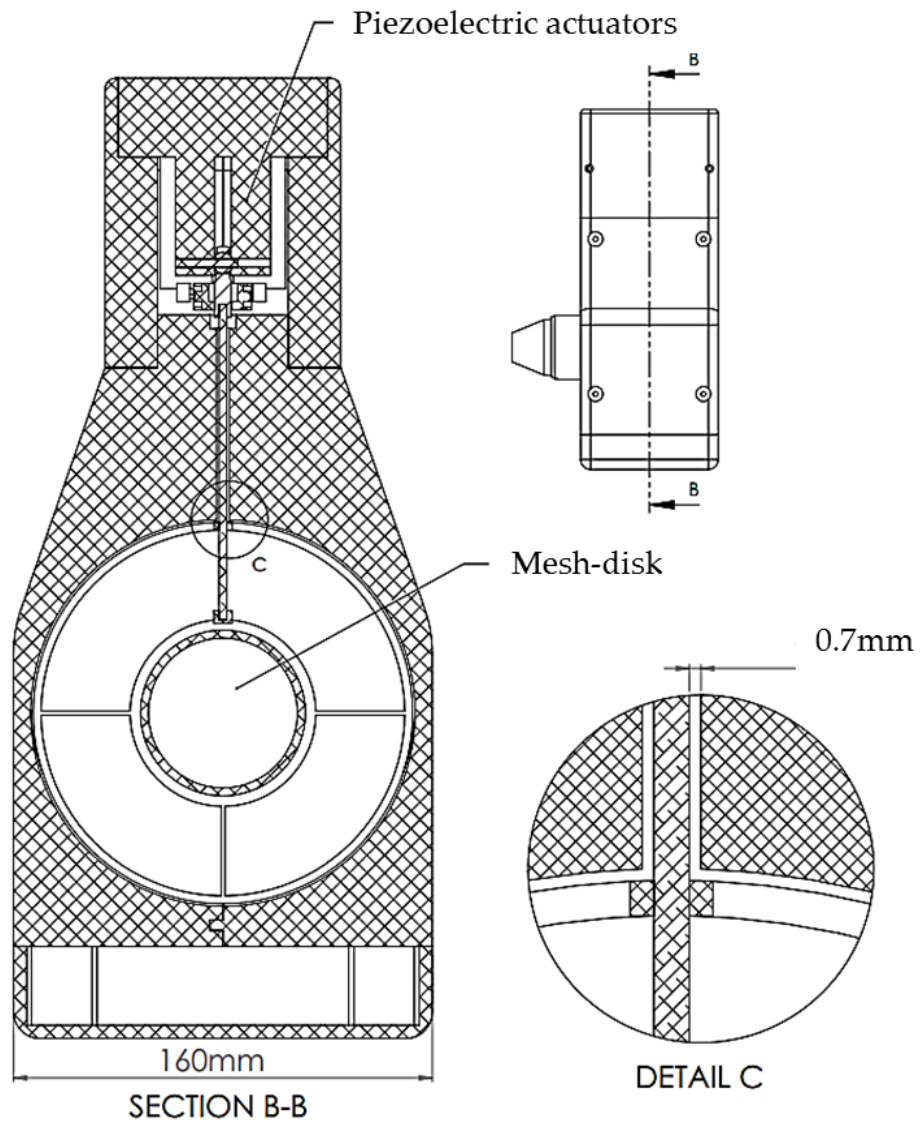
Multi actuator prototype 3D model, view front plane section view.
